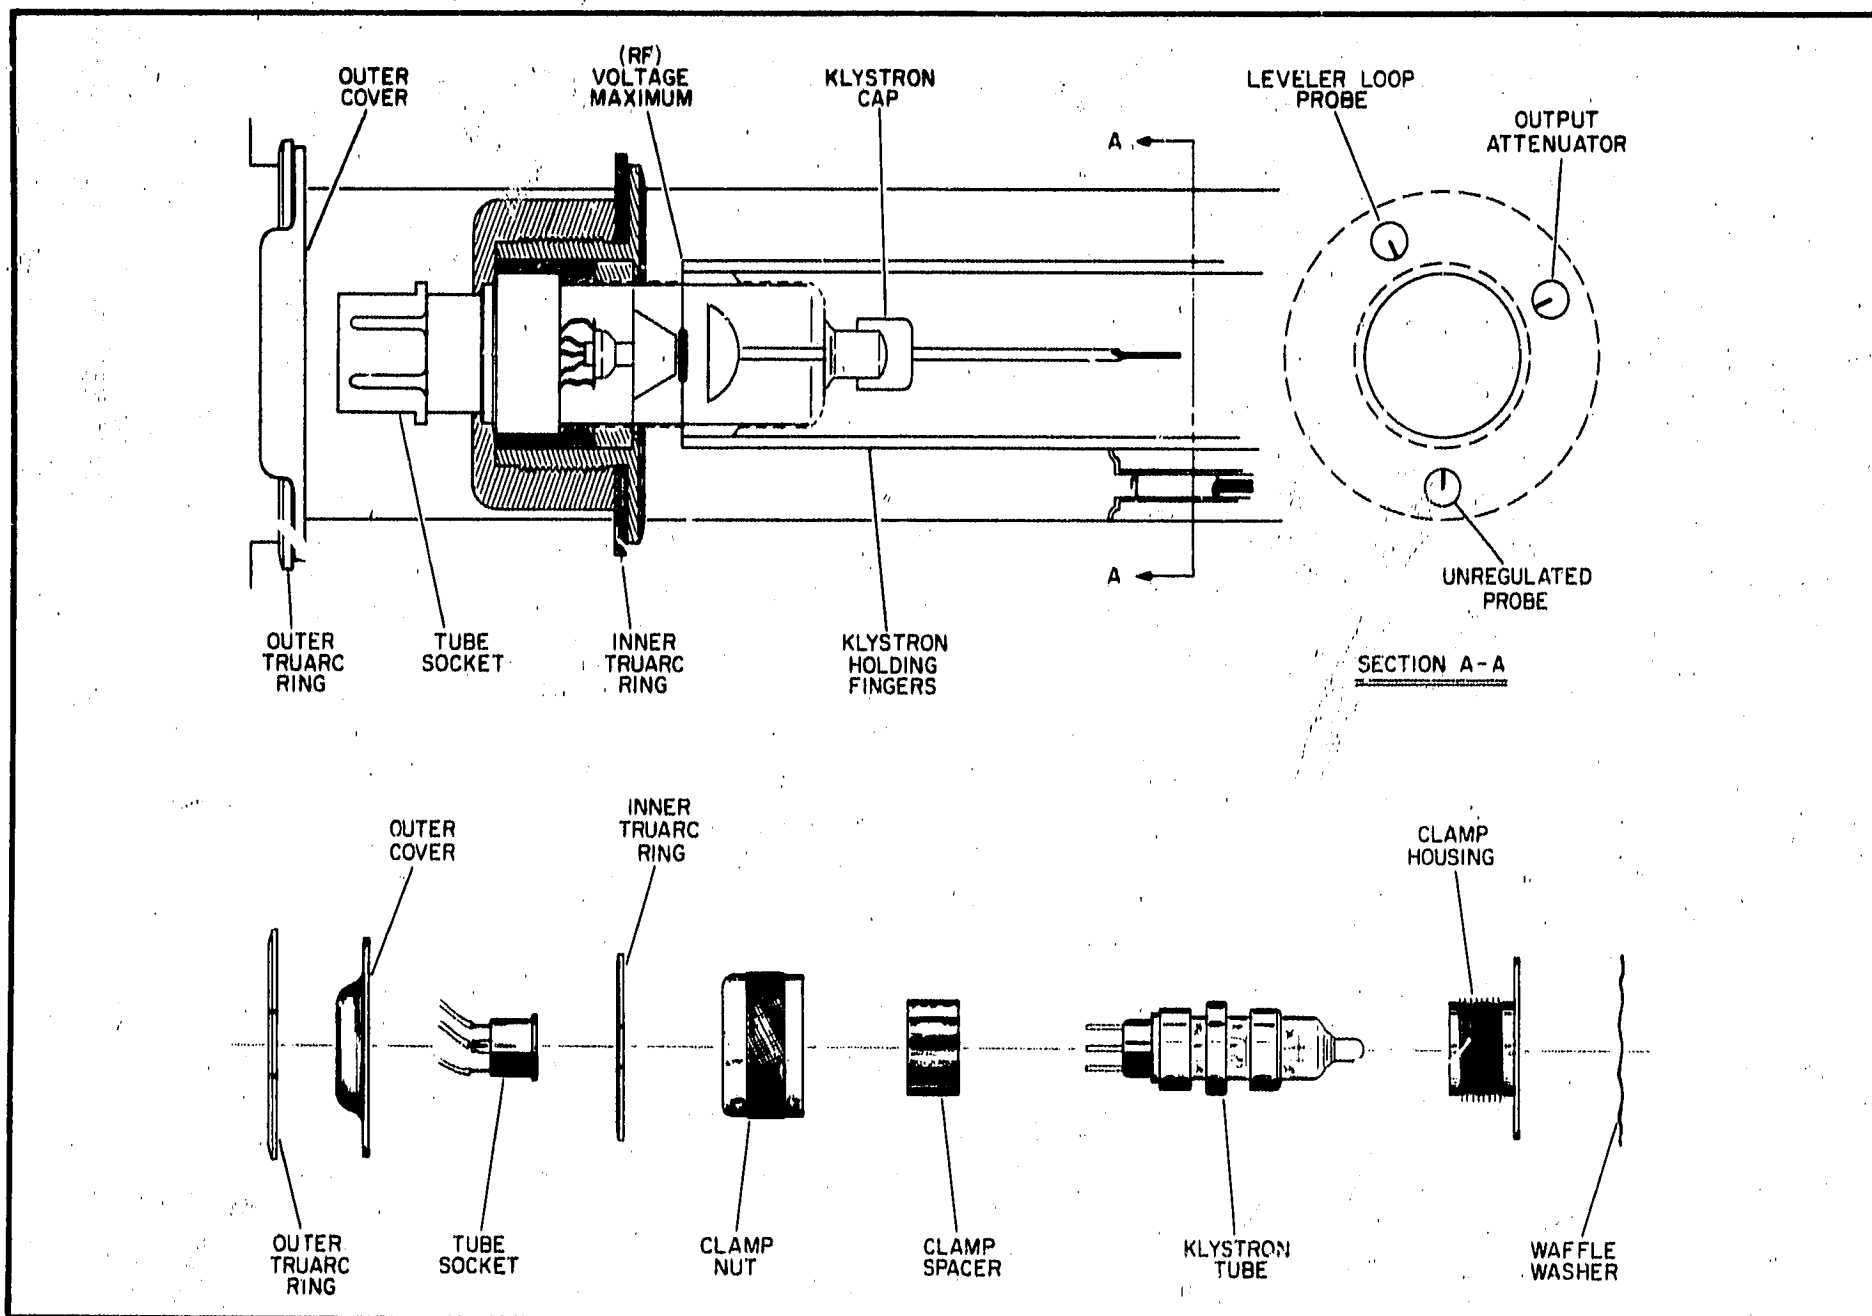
Cut-Away View of Klystron Cavity and Klystron Assembly
